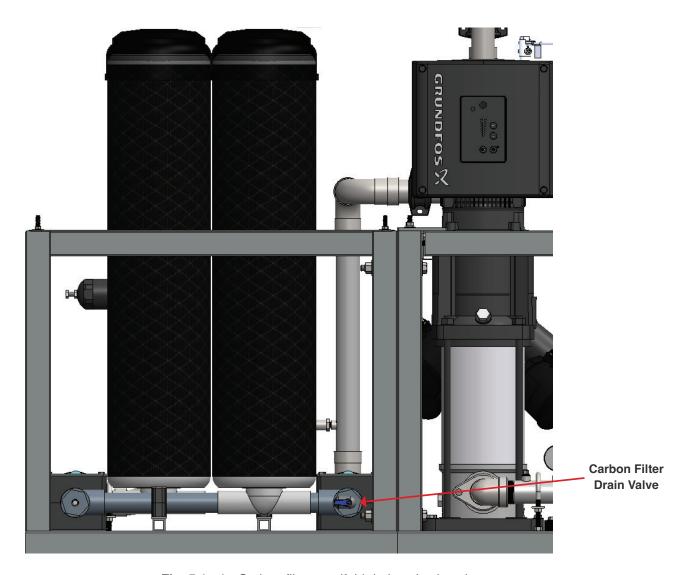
1 - Carbon filter manifold drain valve location
